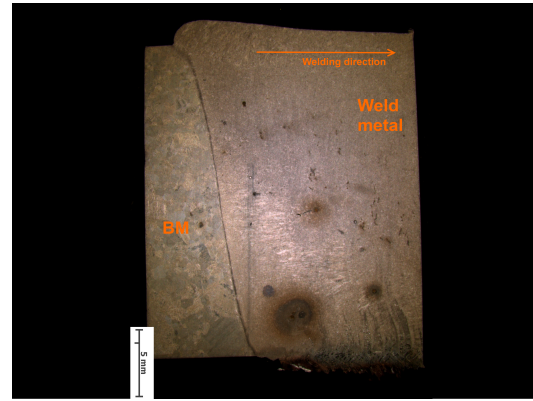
MTP, longitudinal section of blind weld 8 [Adler]: entrapped pores, small hot cracks, and root spiking in some parts
